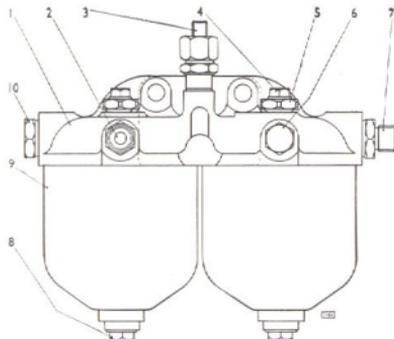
Arrangement of fuel filter (C.A.V.)—twin paper element type.
